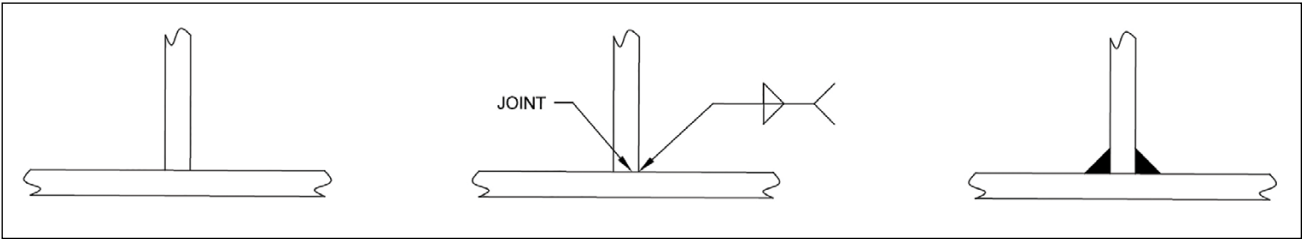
A simple T-joint with welding symbol specifying a double fillet weld.
